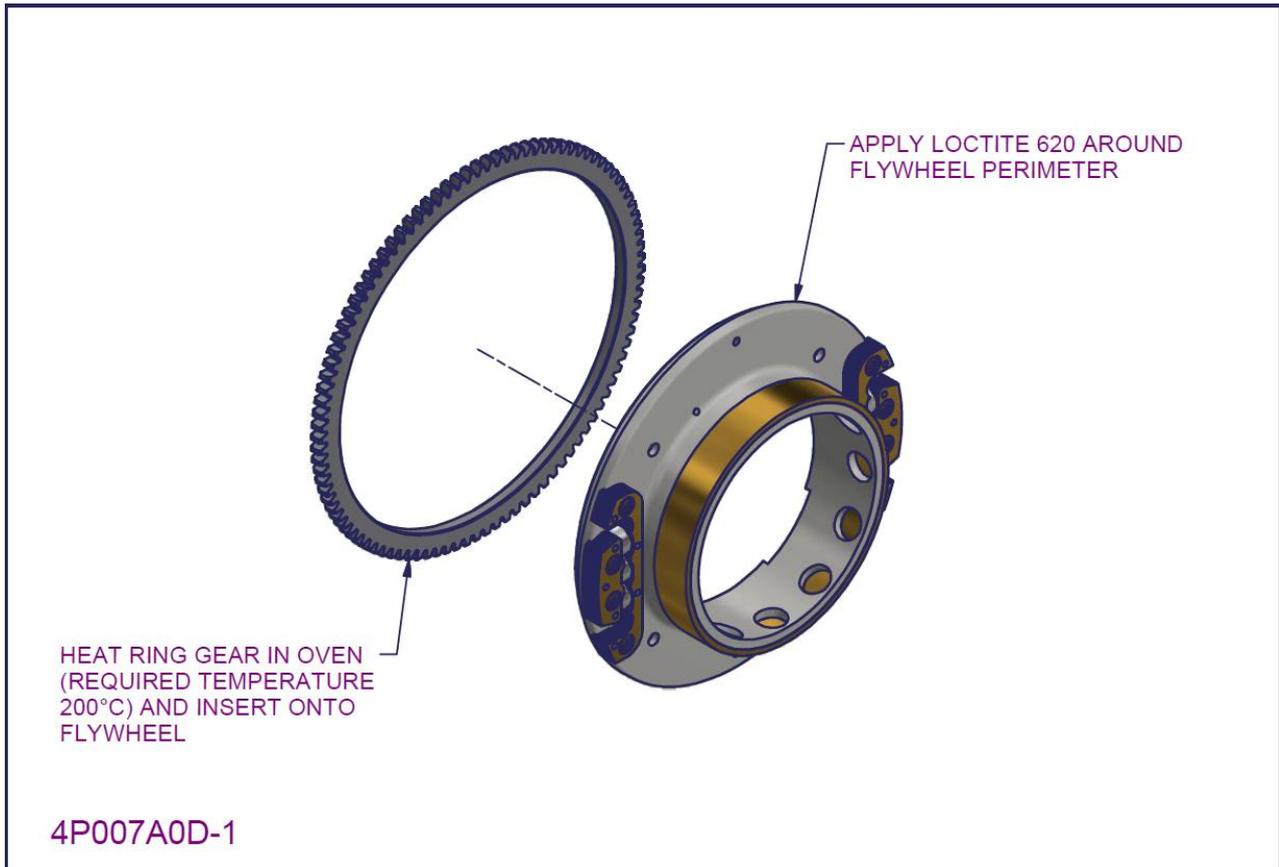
2200/3300 Flywheel subassembly (aluminium cross piece) 3
